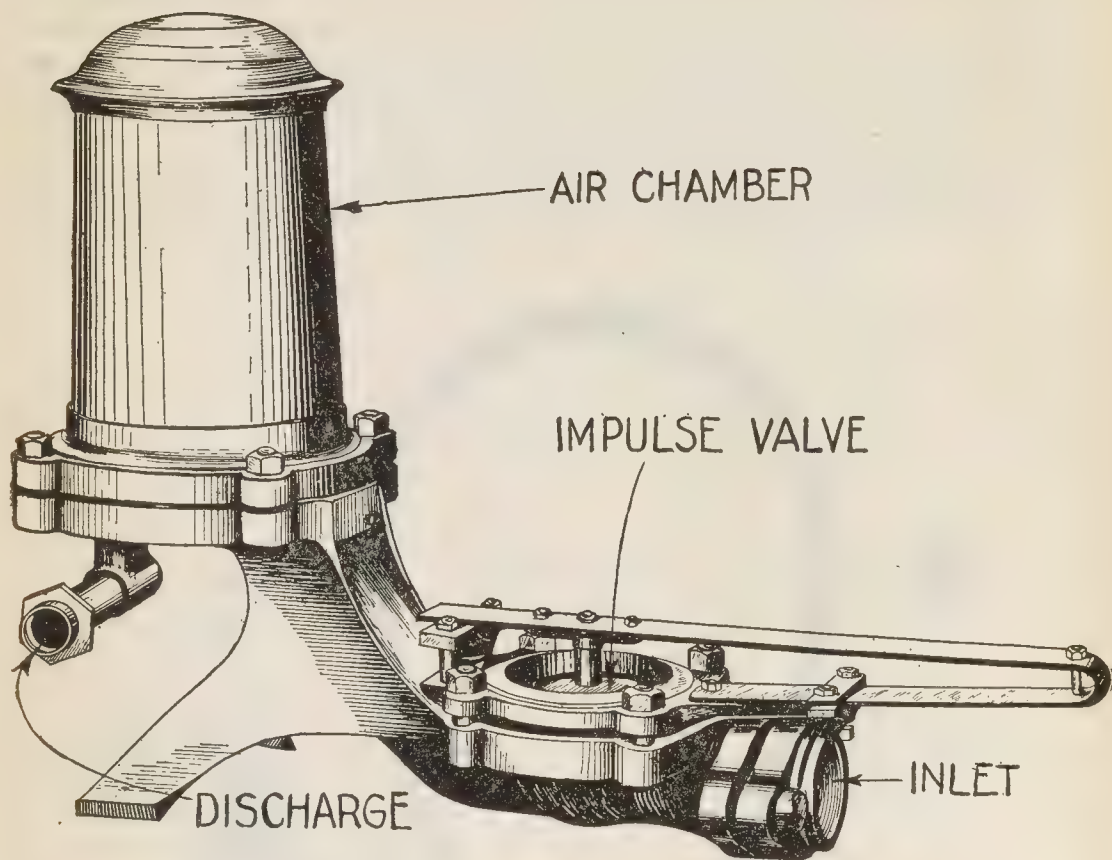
,851.—Rife ram. *In construction*, the escape valve is made of rubber supported by an iron washer underneath, bolting the rubber valve up against the lower face of the valve stem flange, the upper end of valve stem being bolted rigidly to a flexible spring steel lever, the valve rises and drops in the valve chamber true with the valve seat. The distance this valve drops in opening governs the amount of water used per minute up to the full capacity of the ram, for this purpose the lever rest is provided with a coiled steel spring underneath and two regulating bolts by which it may be raised or lowered, thus regulating the drop or opening of the valve. The delivery valve located inside the air chamber is also made of rubber, reinforced by a double flanged iron washer and is held in position by a rubber spring and iron clamp bolted rigidly to the base of the ram. *To set the ram* at full capacity the lever rest should be properly lowered and the bolt in the end of the lever sufficiently drawn that the opposite end lies gently upon the lever rest. In setting the ram to use less water per minute the manipulation of these bolts should be reversed. At no time should the water escape through the valve with force spurting from the opening; the lever rest should be lowered or the tension bolt in the end of lever slackened. The brass air feeder pin which regulates the air supply must always be sufficiently open that a little water escapes at each stroke of the ram. A metallic sound in the pipes or irregular flow at place of delivery indicates that the air pipe should be slightly opened while a quantity of air escaping at intervals, indicates it should be slightly closed.
